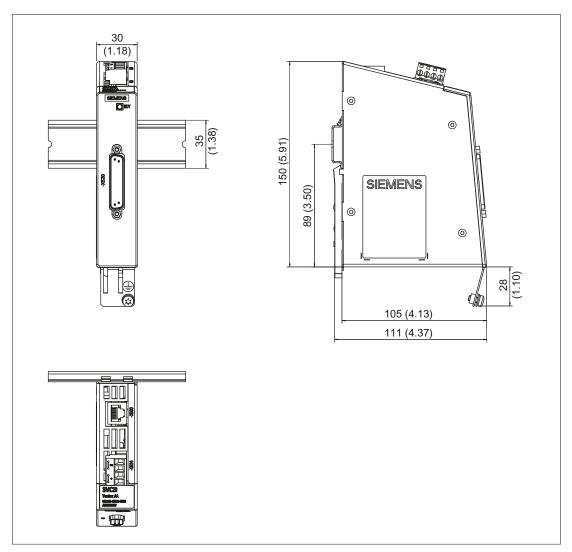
Dimension drawing of the Sensor Module Cabinet SMC20, all data in mm and (inches)
